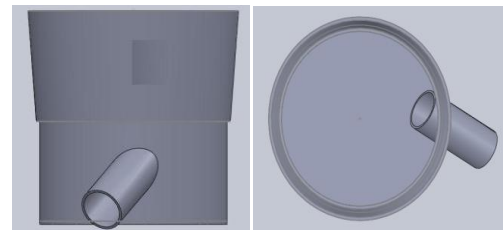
Air Inlet Pipe at 30° Inclined Horizontally and Vertically-Cooling Tower Model
